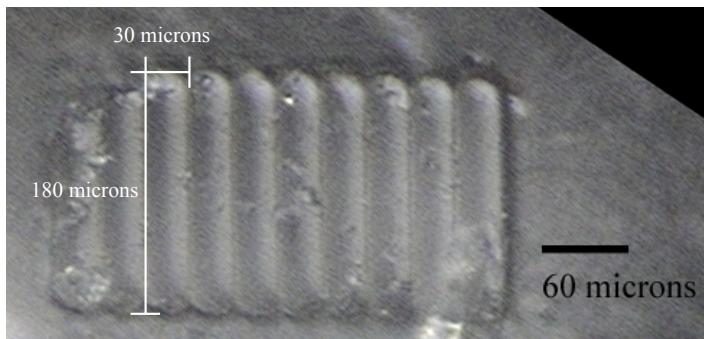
microscopic image of the smallest fabricated flying carpet mad out of silicon elastomer. Defects in the semi-cylindrical features are due to tearing of the elastomer while releasing it from the mold.
